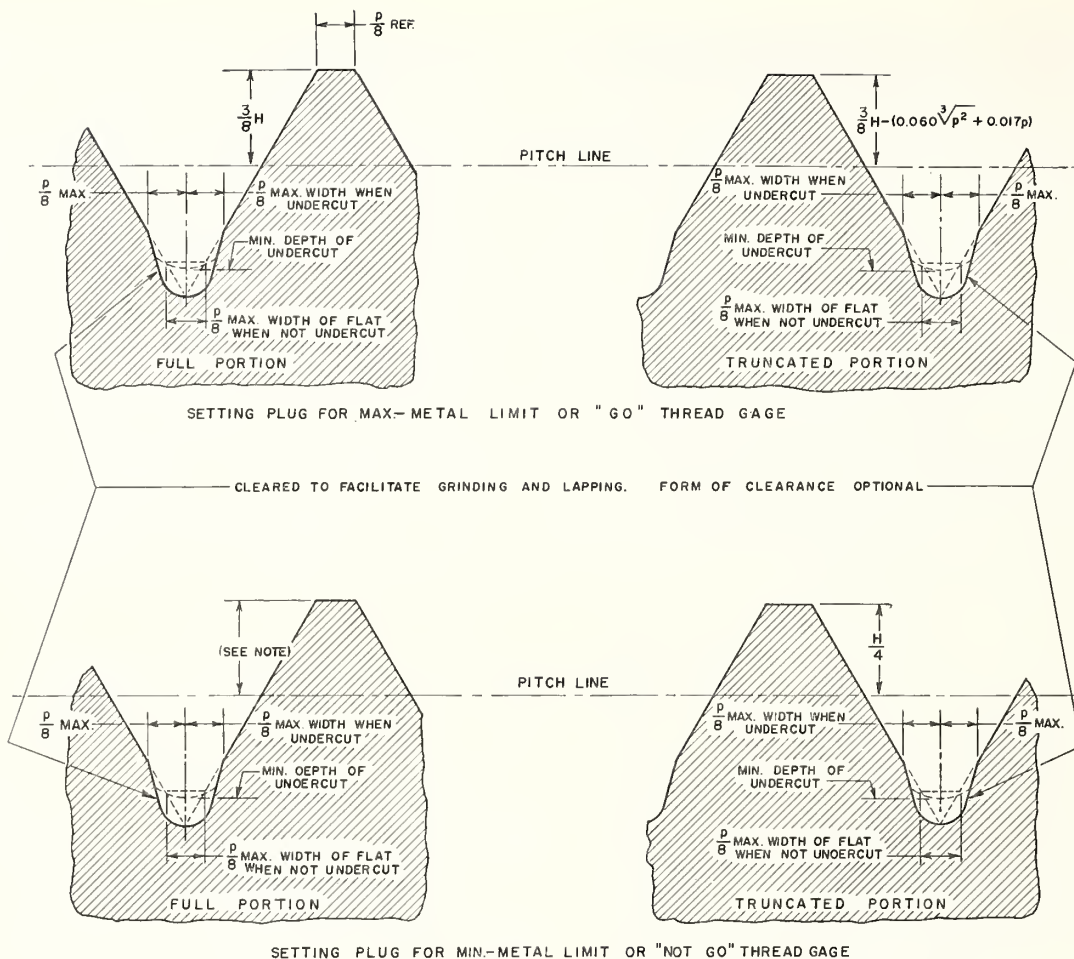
Thread form of truncated thread setting plug gages.
